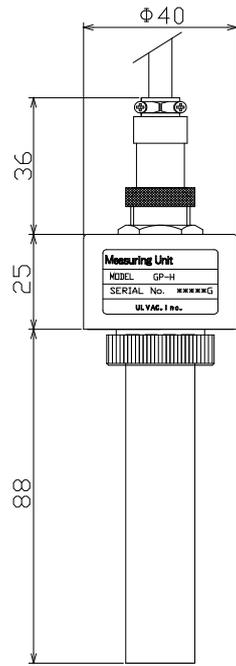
Dimensional drawing for measuring unit GP-H
